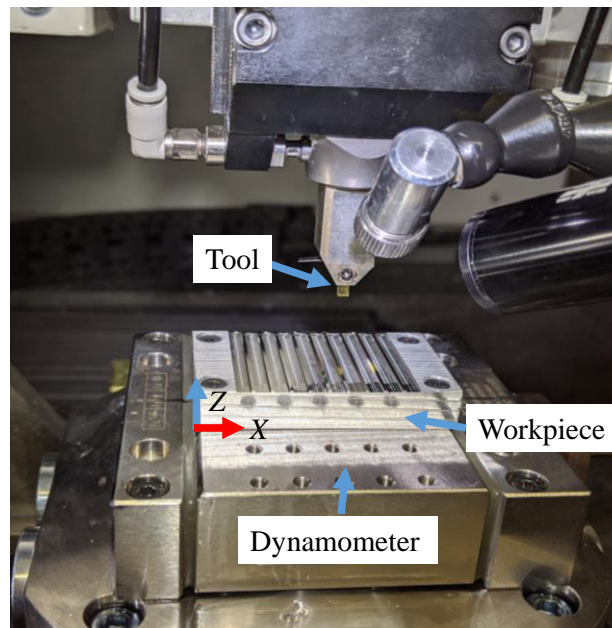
Multi-ribbed Aluminum T-6061 workpiece used for experiment.
